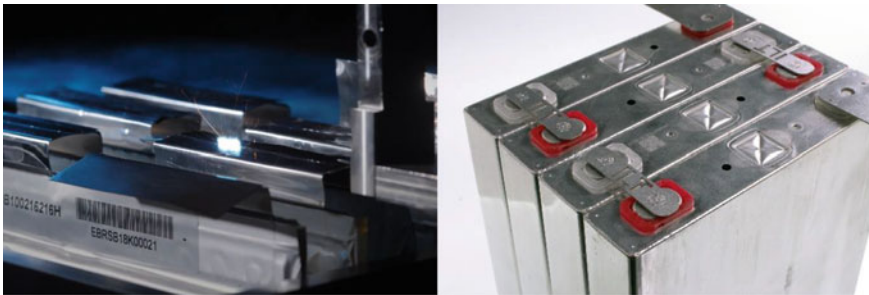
Laser welding of pouch cells (left), laser welded prismatic cells (right)
